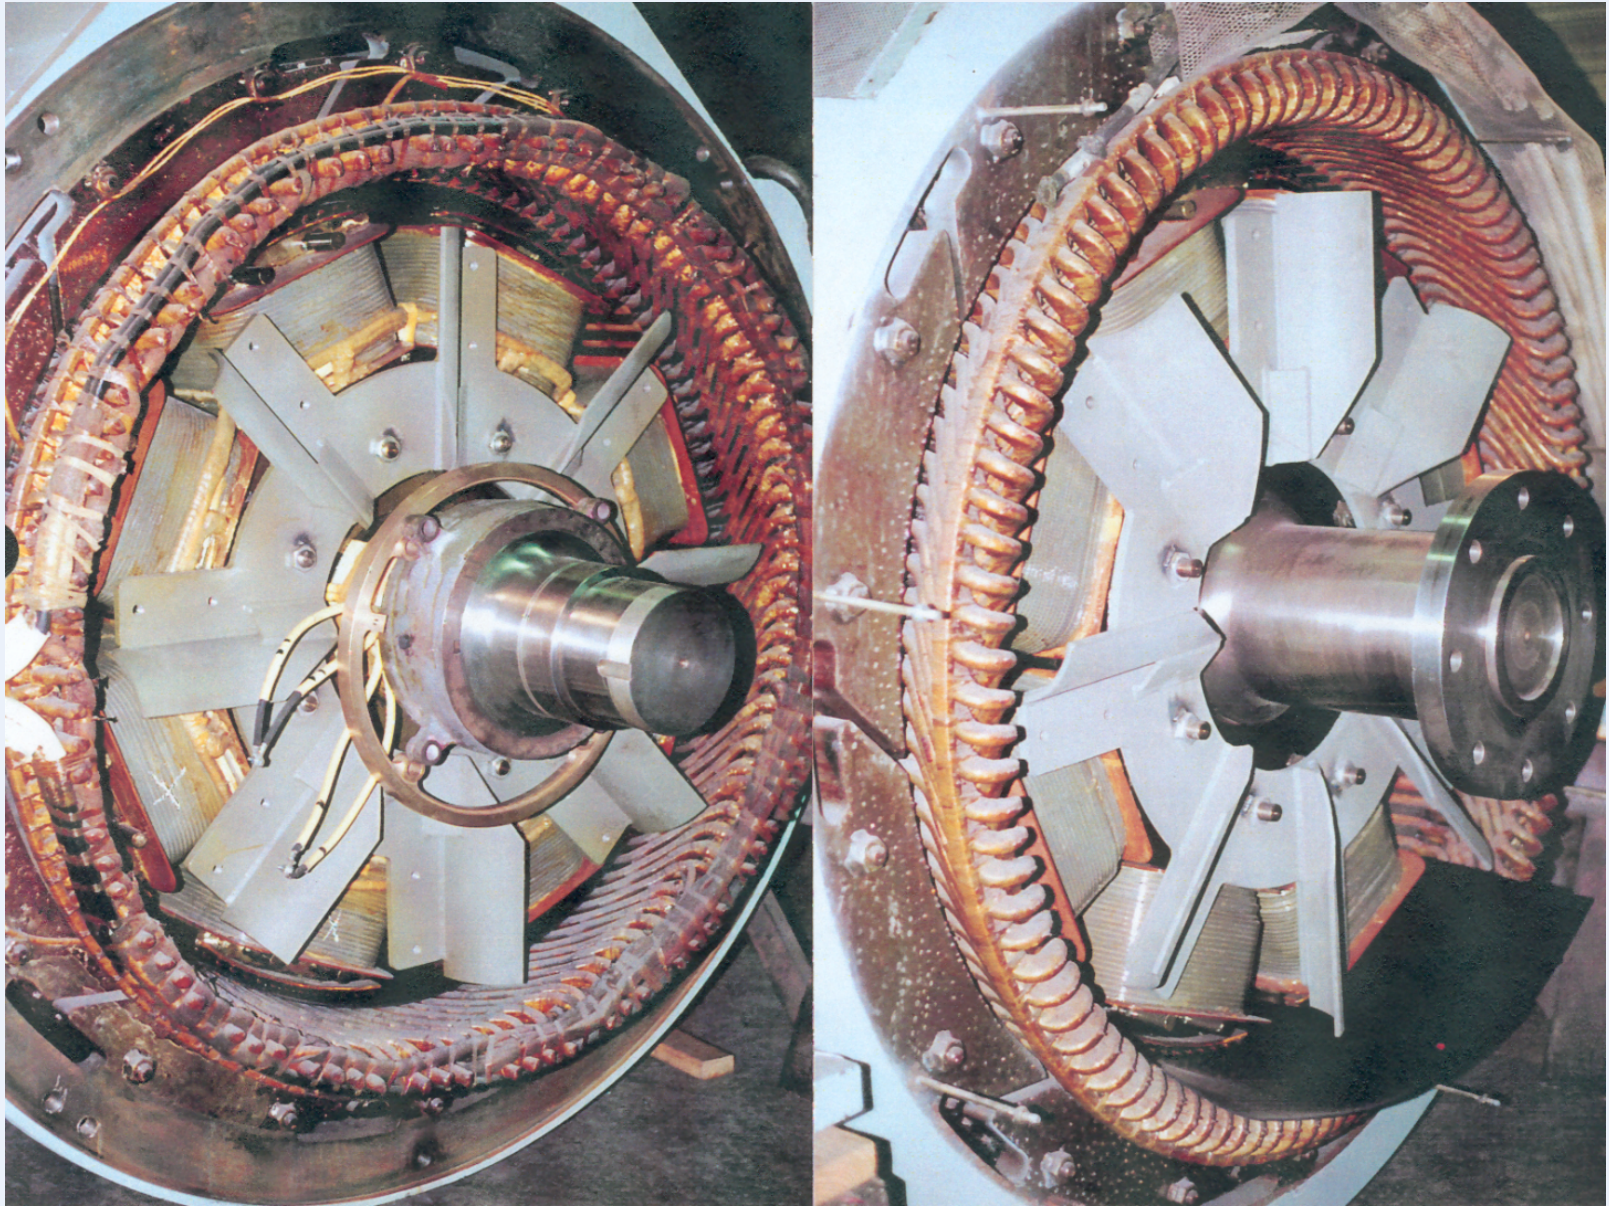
Rotor Installed within Stator – Note fan assembly & slip ring assembly
